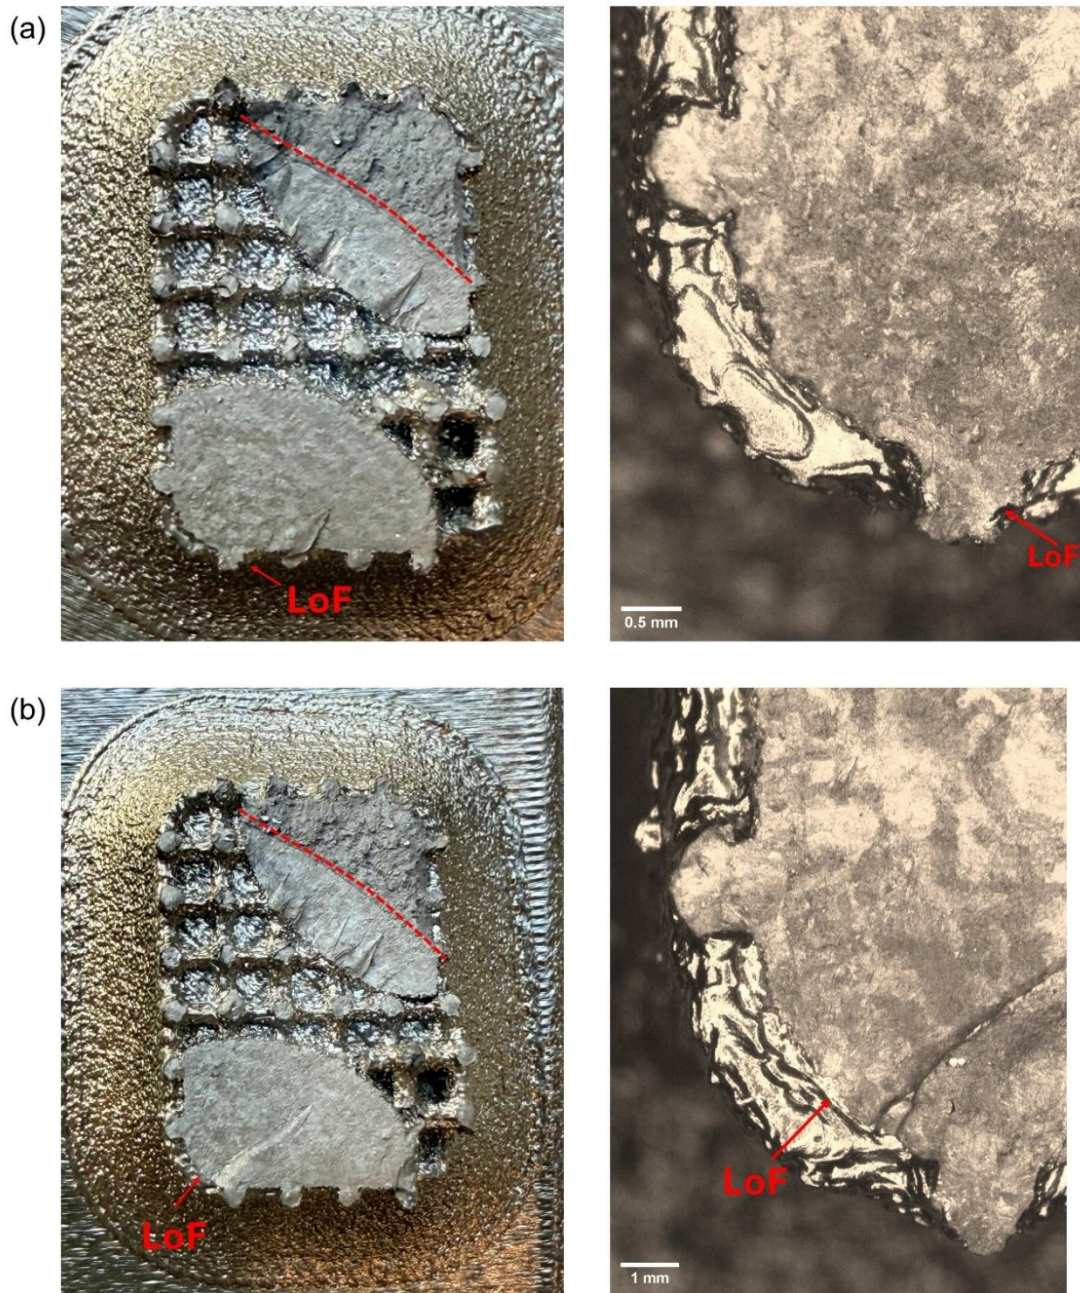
Fracture surface of the failed stem specimens: (a) SR-L-1 and (b)SR-L-4, the LoF defects are pointed by red arrows
